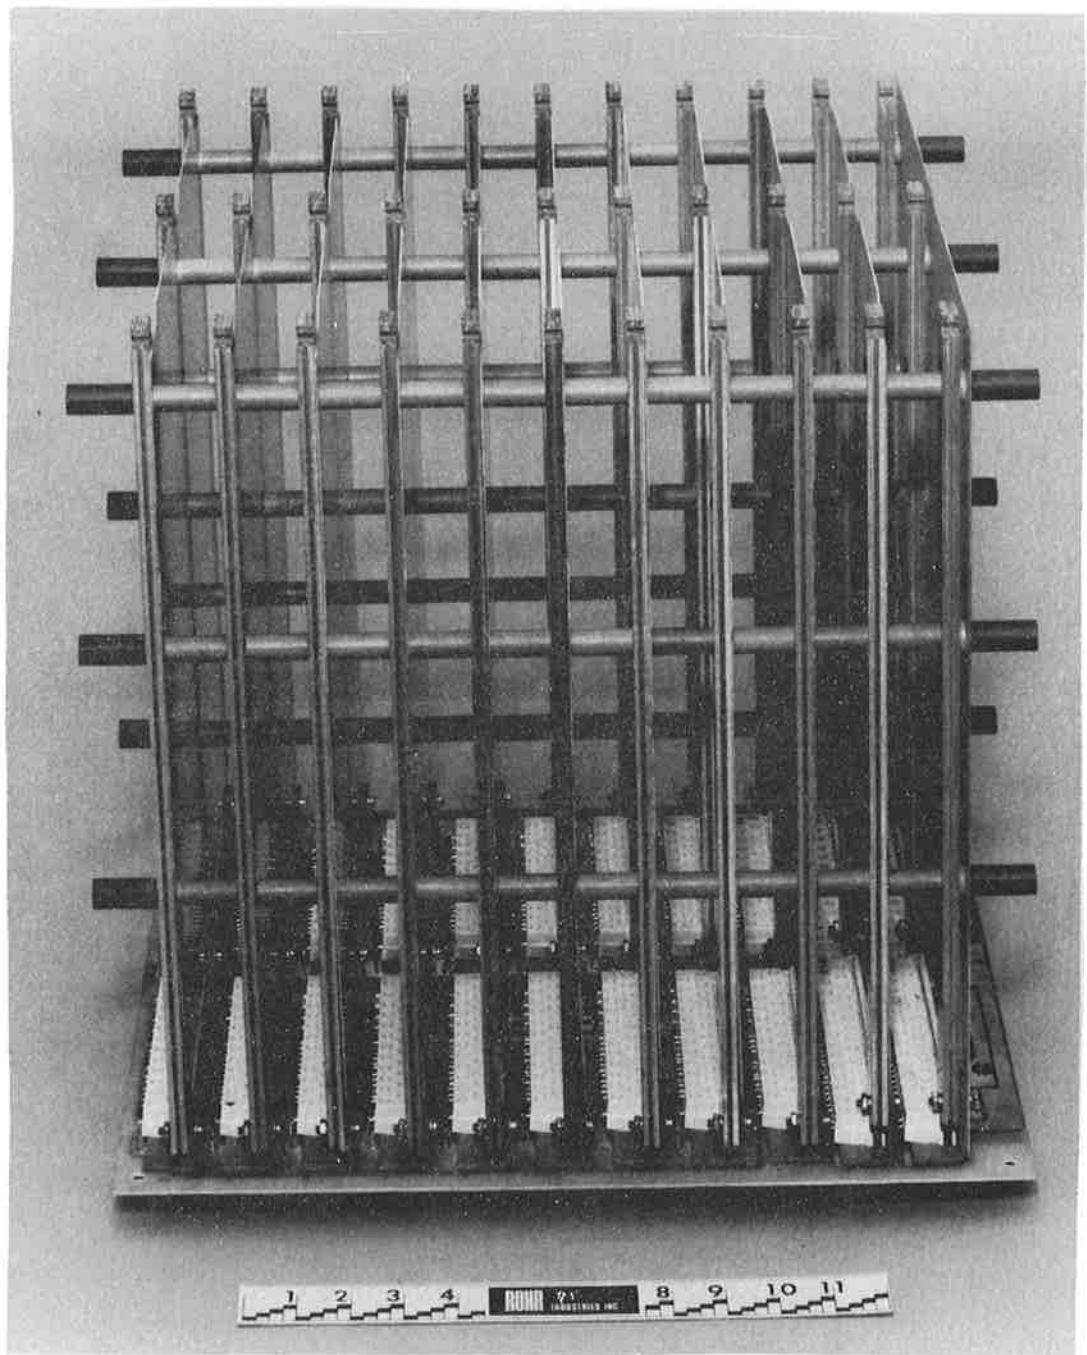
MOTHER P.C. BOARD ASSEMBLY
